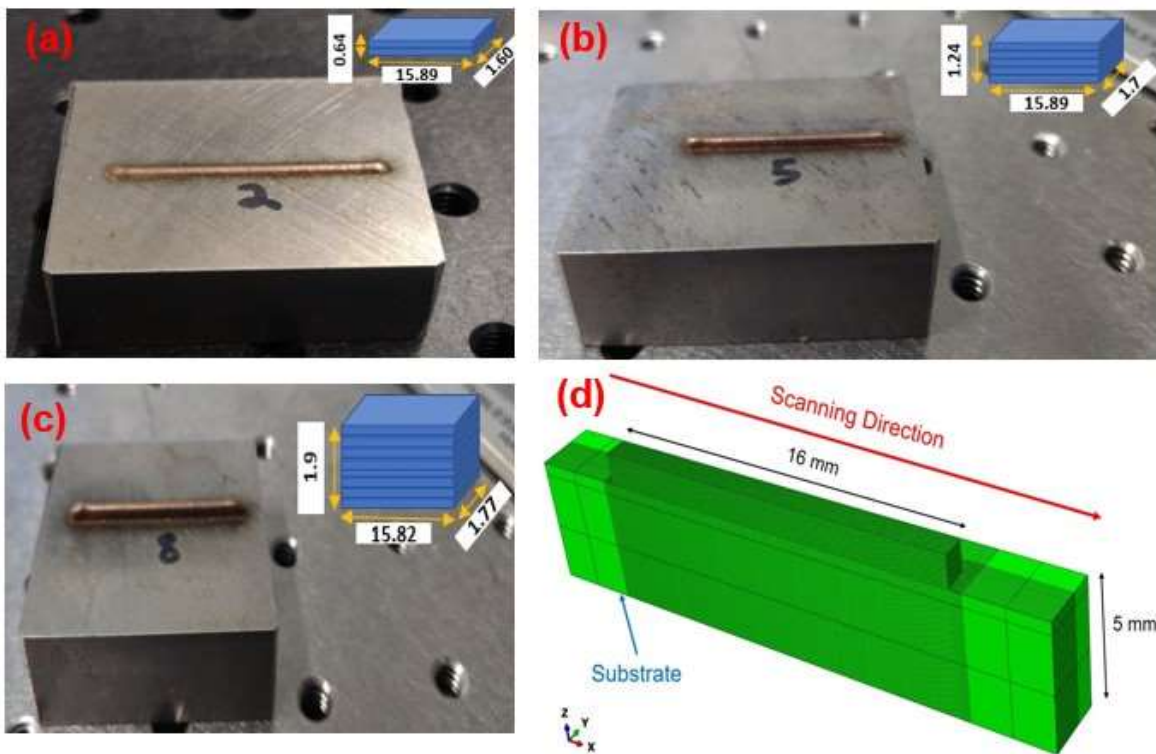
DED manufactured GRCop-42 samples (a) a 2-layer sample (b) a 5-layer sample (c) an 8-layer sample and (d) center-cut view of the geometry for thermomechanical analysis
